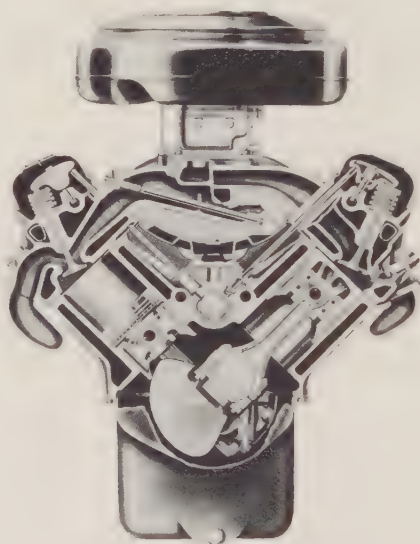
A transverse section of the overhead valve, Pontiac V-8 engine reveals the many internal surfaces which must be formed in the sand mold casting process by the use of dry-sand cores. In many instances interior passages must be surrounded by other cavities to provide proper engine function. This is well illustrated in the cylinder heads, where both the intake and exhaust ports must be at least partially enveloped by water jackets to obtain cooling of the valve seats and combustion chamber areas. In the cylinder block the unfinished bores must be formed by the use of cores, which also must be surrounded by water-jacket cores. The method of setting and supporting cores such as these in the mold presents an interesting problem to the design engineer and foundryman.
